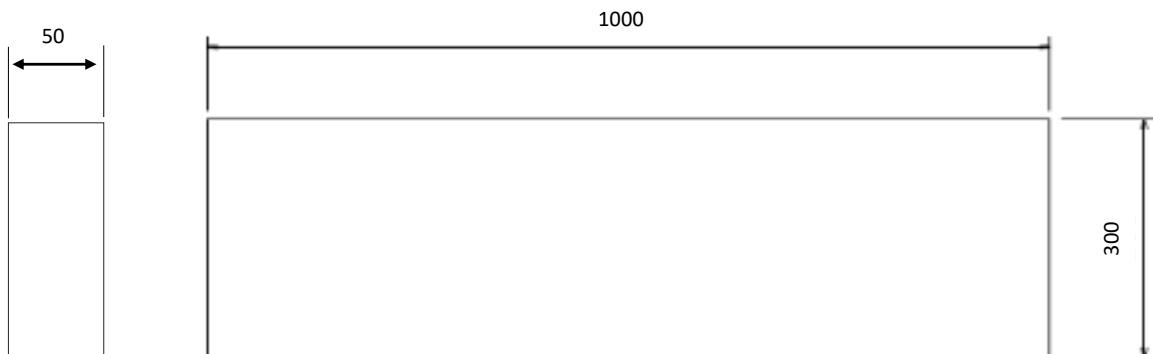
Demonstrator stock condition (all dimensions in mm)
